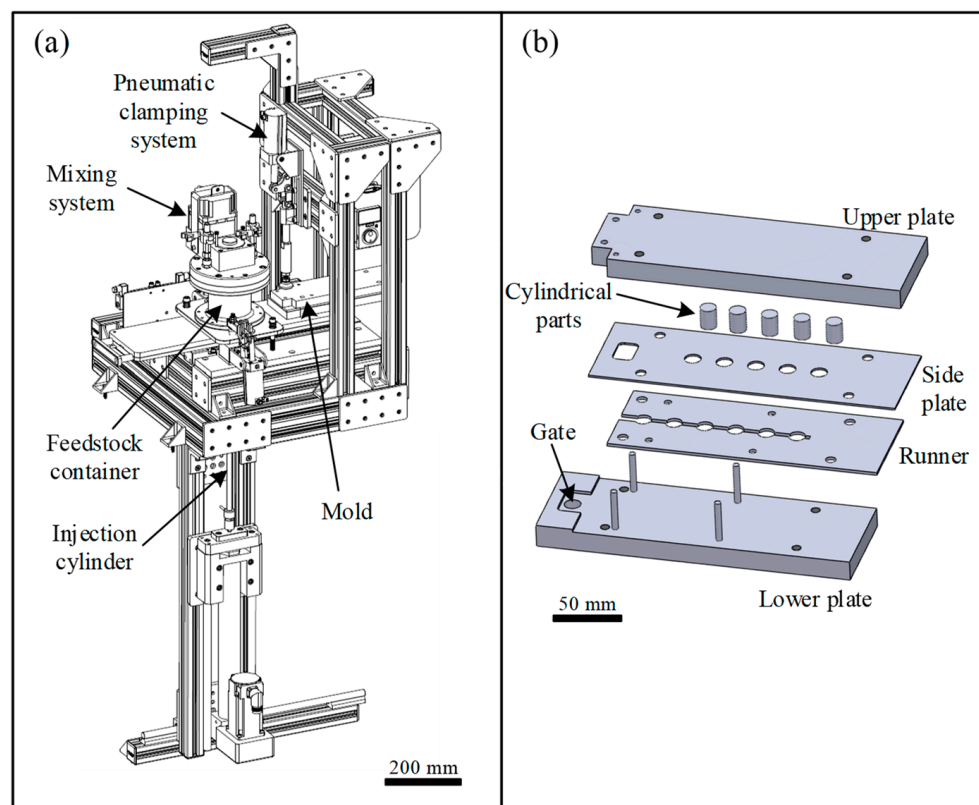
Injection setup showing (a) the molding press, and (b) an exploded view of the mold cavity used to produce cylindrical green parts.
